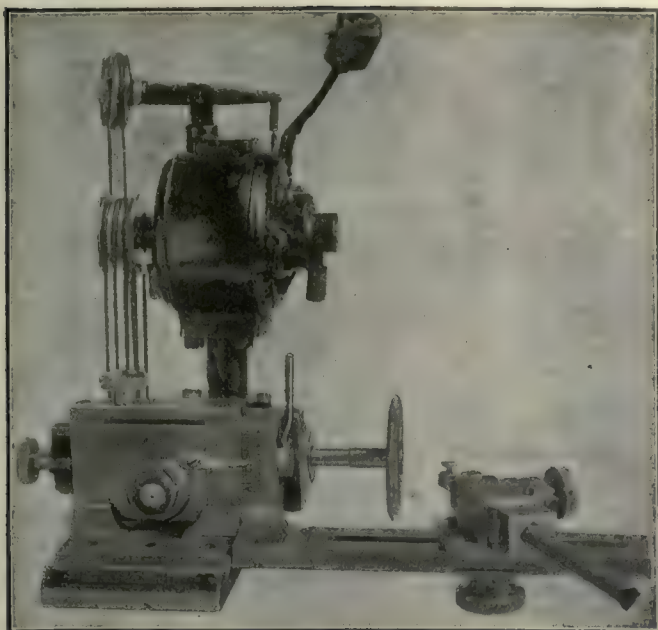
MULTI-GRADUATED GRINDING ATTACHMENT
